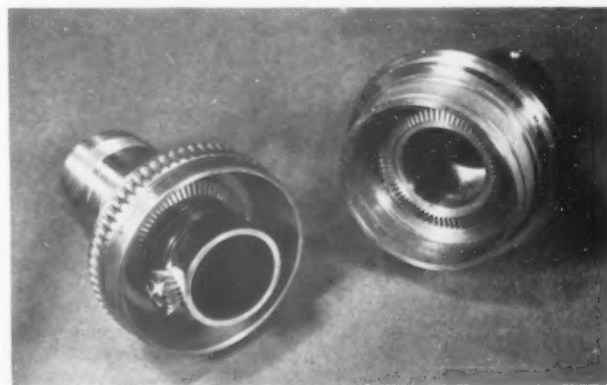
Worm and gear housings are separately sub-assembled prior to final assembly.
